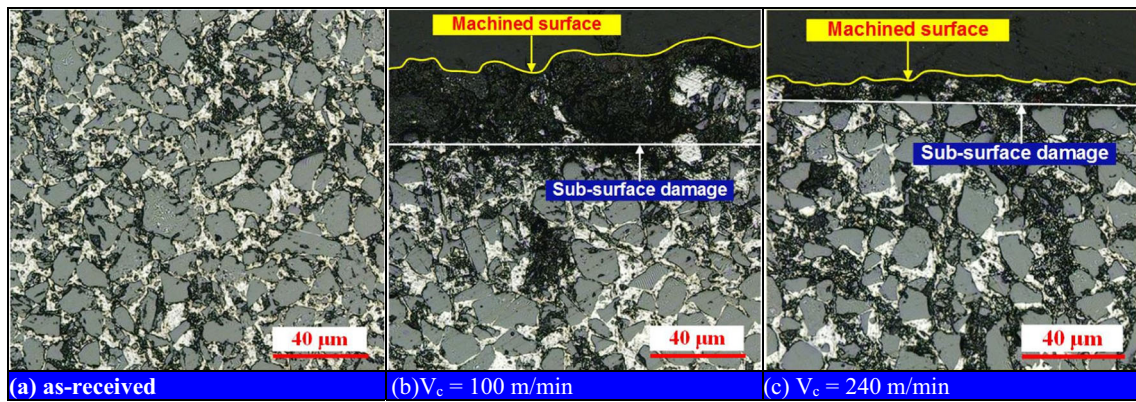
Machining induced surface and sub-surface damages in the Al6063/SiC<sub>p</sub>/65p workpiece machined using different milling speeds
